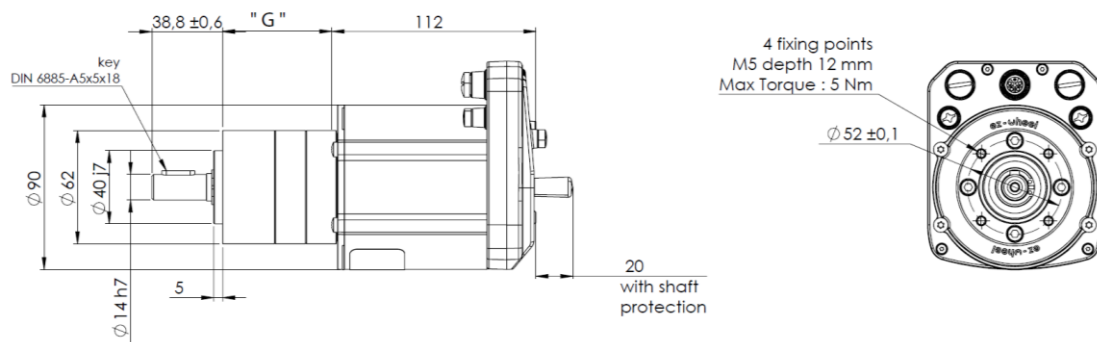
Overall dimensions – SWD® Core with gearbox(es)
